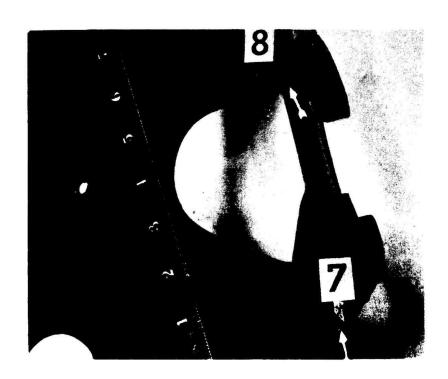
Right Rear Suspension Arm Bottom Detail View of Figure III-38.
